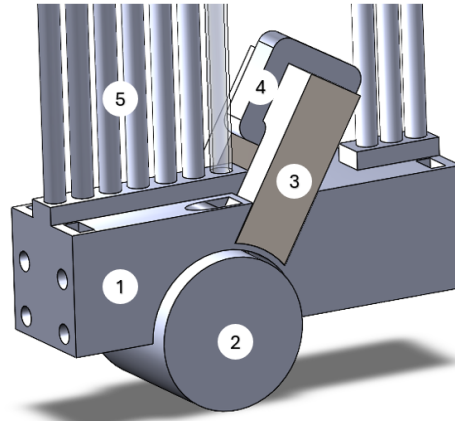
The bearing assembly. 1 - Bearing, 2 - Shaft, 3 - Electromagnet yoke, 4 - Coil, 5 - Pressure tubes.
